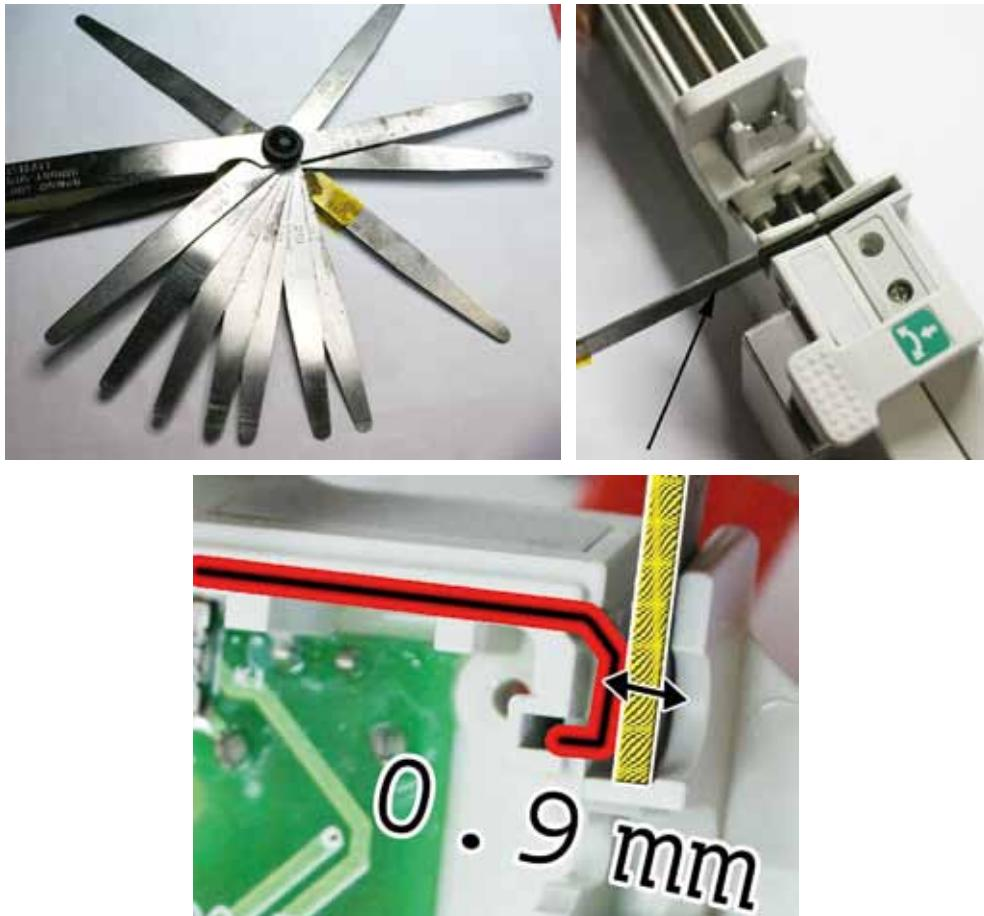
Metric feeler gauge (right), measuring 0.9mm (left and bottom)
